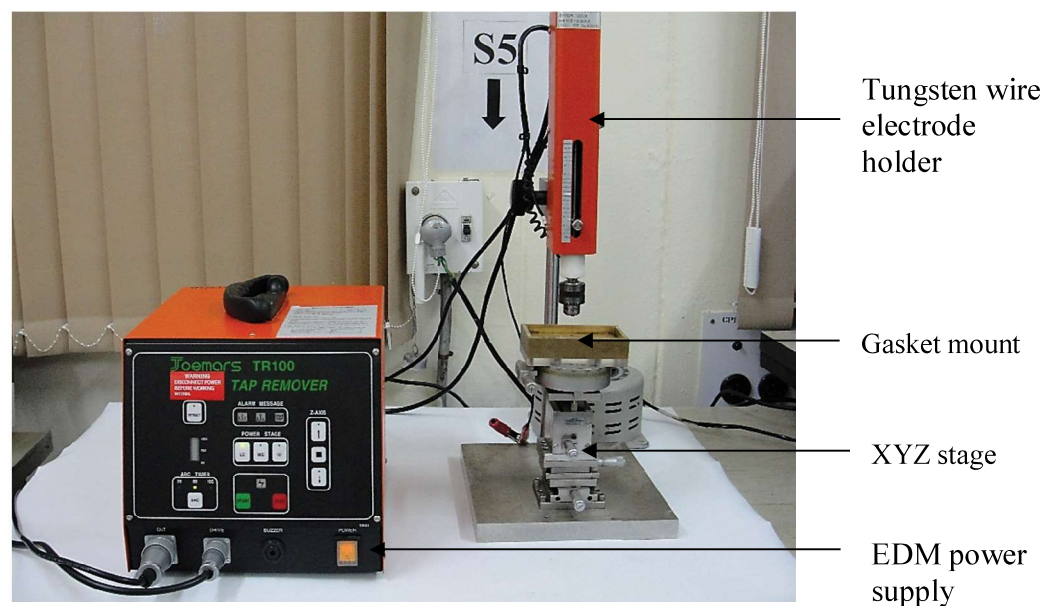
Electric Discharge Machine with drilling assembly
